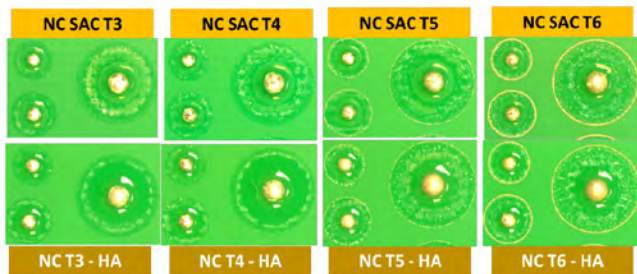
Solder balling of the no-clean solder pastes before and after heat aging.
